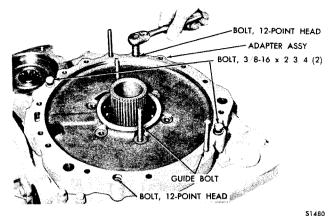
Installing adapter assembly bolts (-3 overdrive model)
